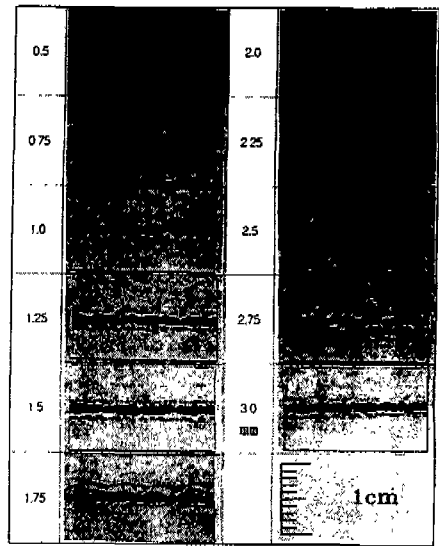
Cut shape change on bottom side with distance between nozzle and workpiece(Conv. nozzle  $\phi$  1.0mm, gas pressure  $3\text{kgf/cm}^2$ , thickness 3mm)
